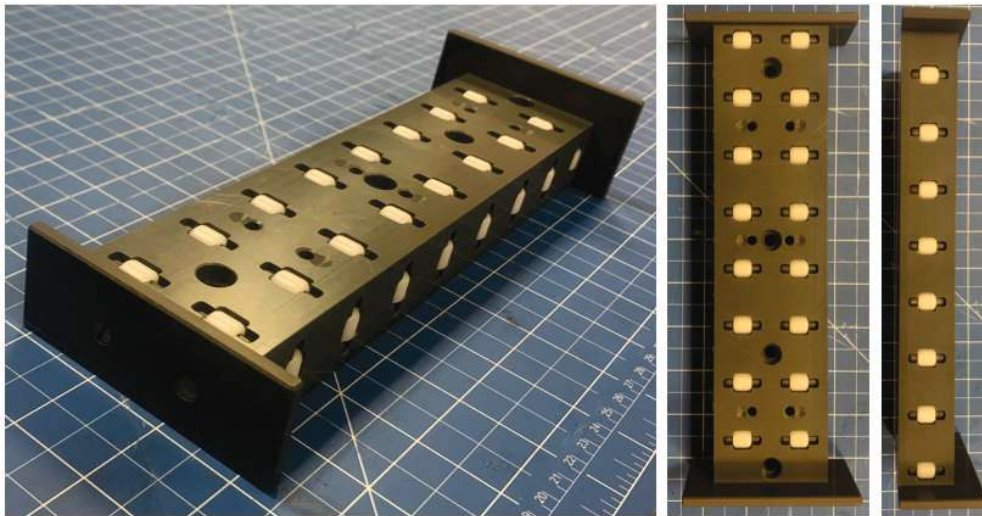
Photograph of the manufactured AOB monorail on a cm grid for scale. Left = isometric view, middle = top view, right = side view.
